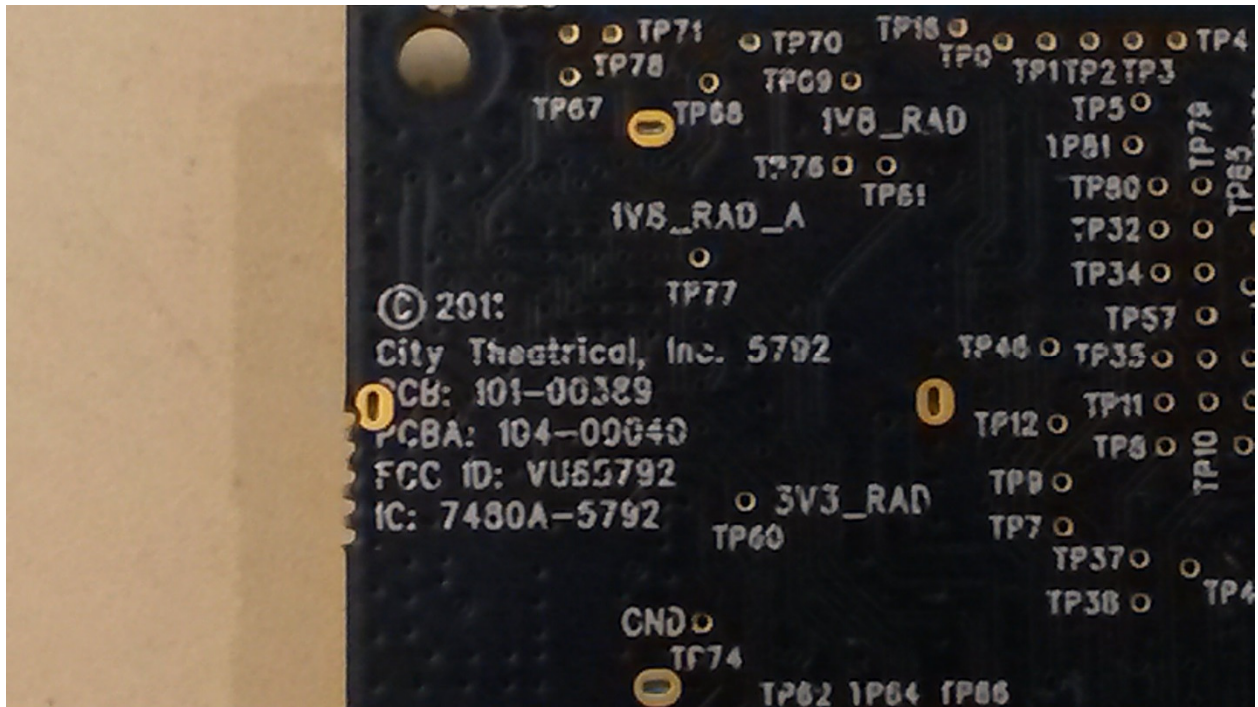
Modular Radio PCBA, Solder Side
